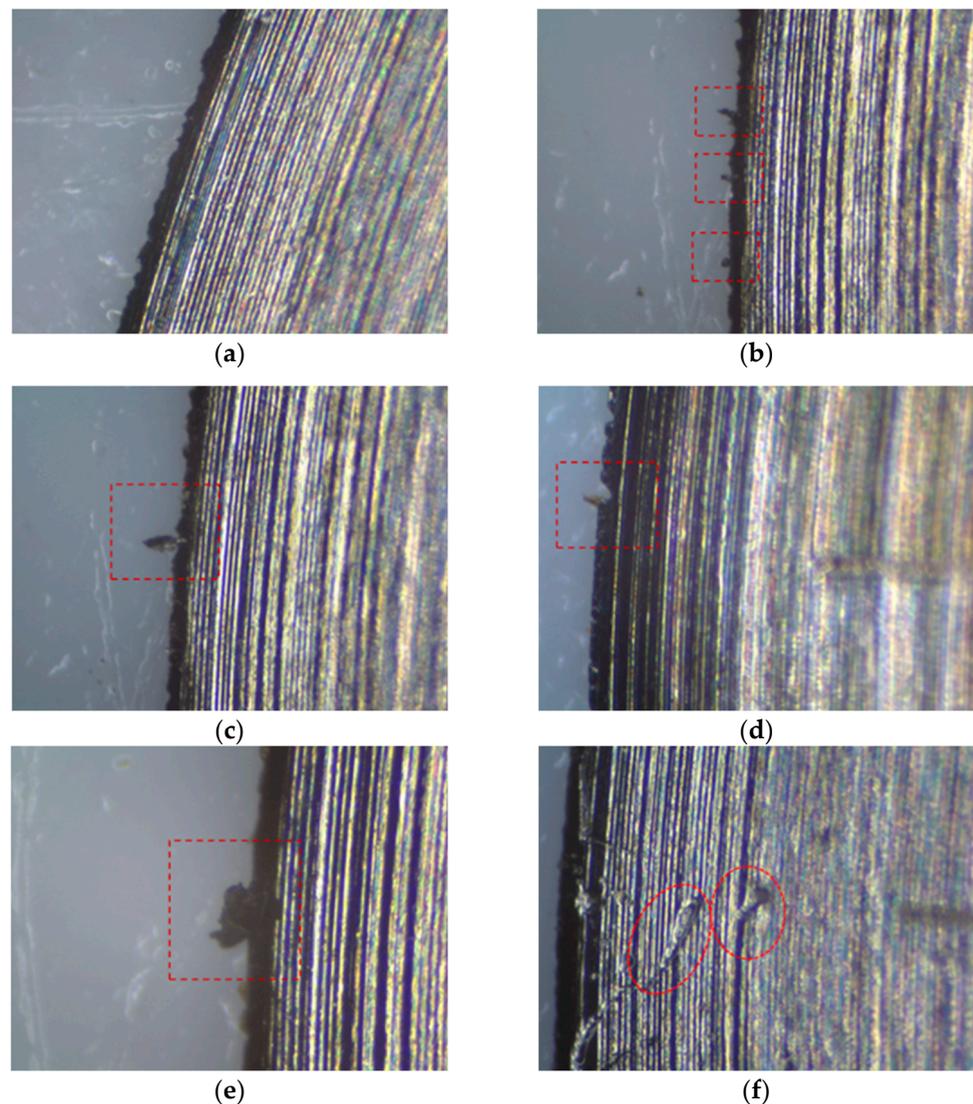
The morphology of tool wear: (a) Intact cutting edge; (b) Small tears (the cutting length reached 2.87 m); (c) Large tears (the cutting length reached 34.44 m); (d) Edge chipping (the cutting length reached 51.66 m); (e) Curls (the cutting length reached 413.28 m); (f) Scratches (the cutting length reached 515.04 m).
